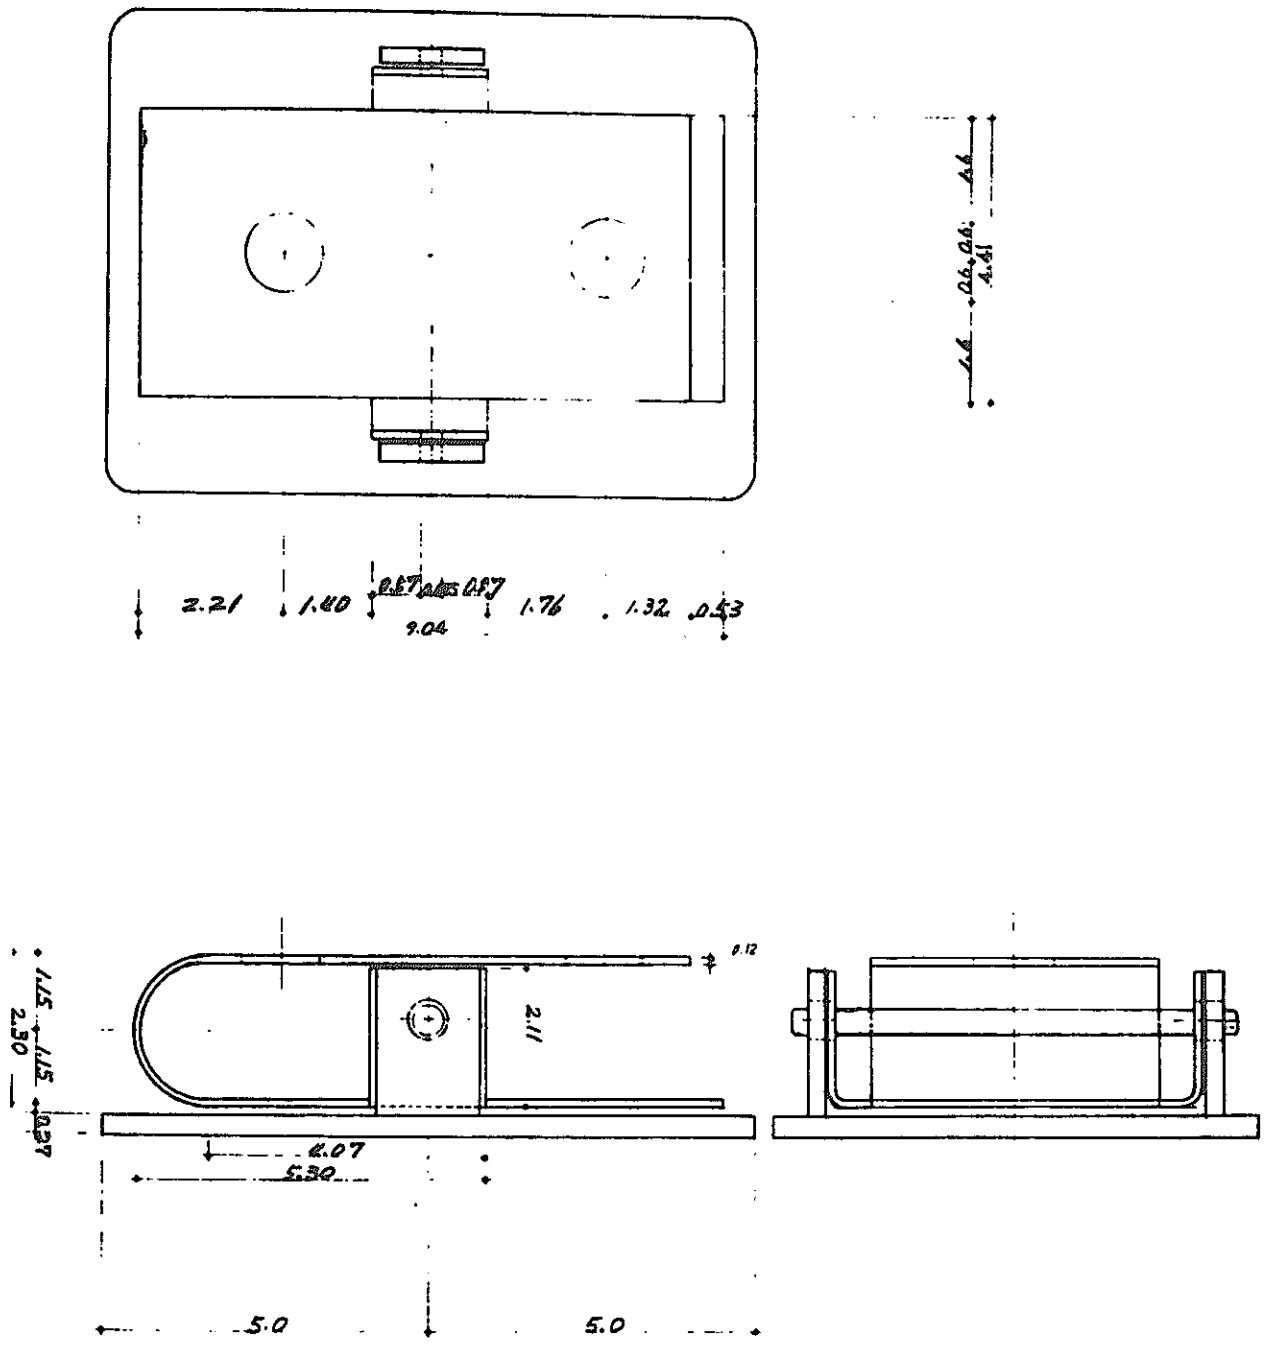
₂ Dimensions of Specimens Used for Rigidity Test of Plate Spring (S: 1/1)
